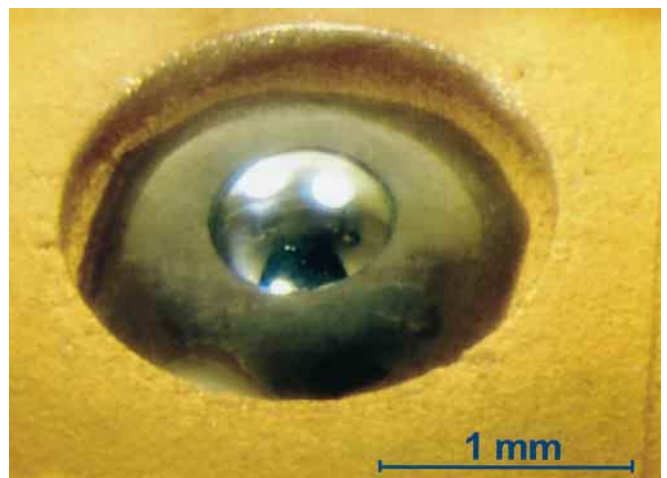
Spherical lens, sealed to a metal casing with a sintered solder glass ring
